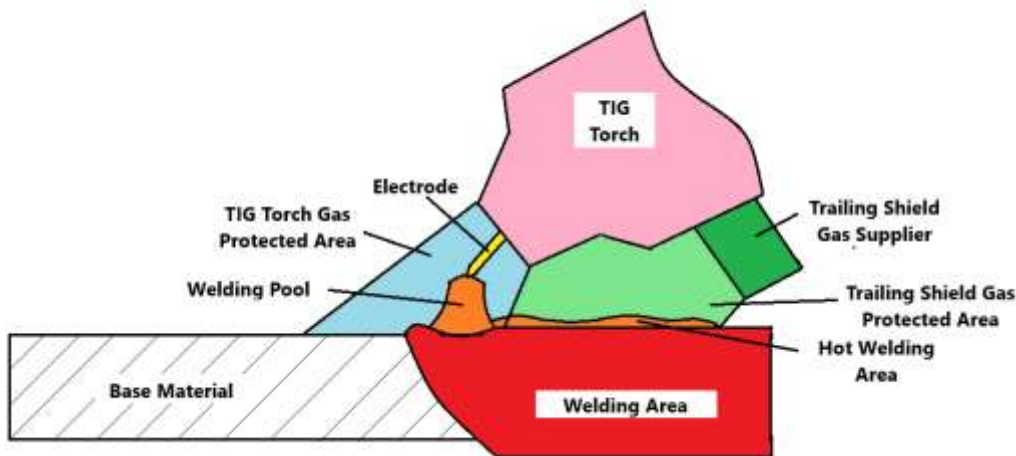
Shielding Gas Protection System in TIG Welding for Titanium
